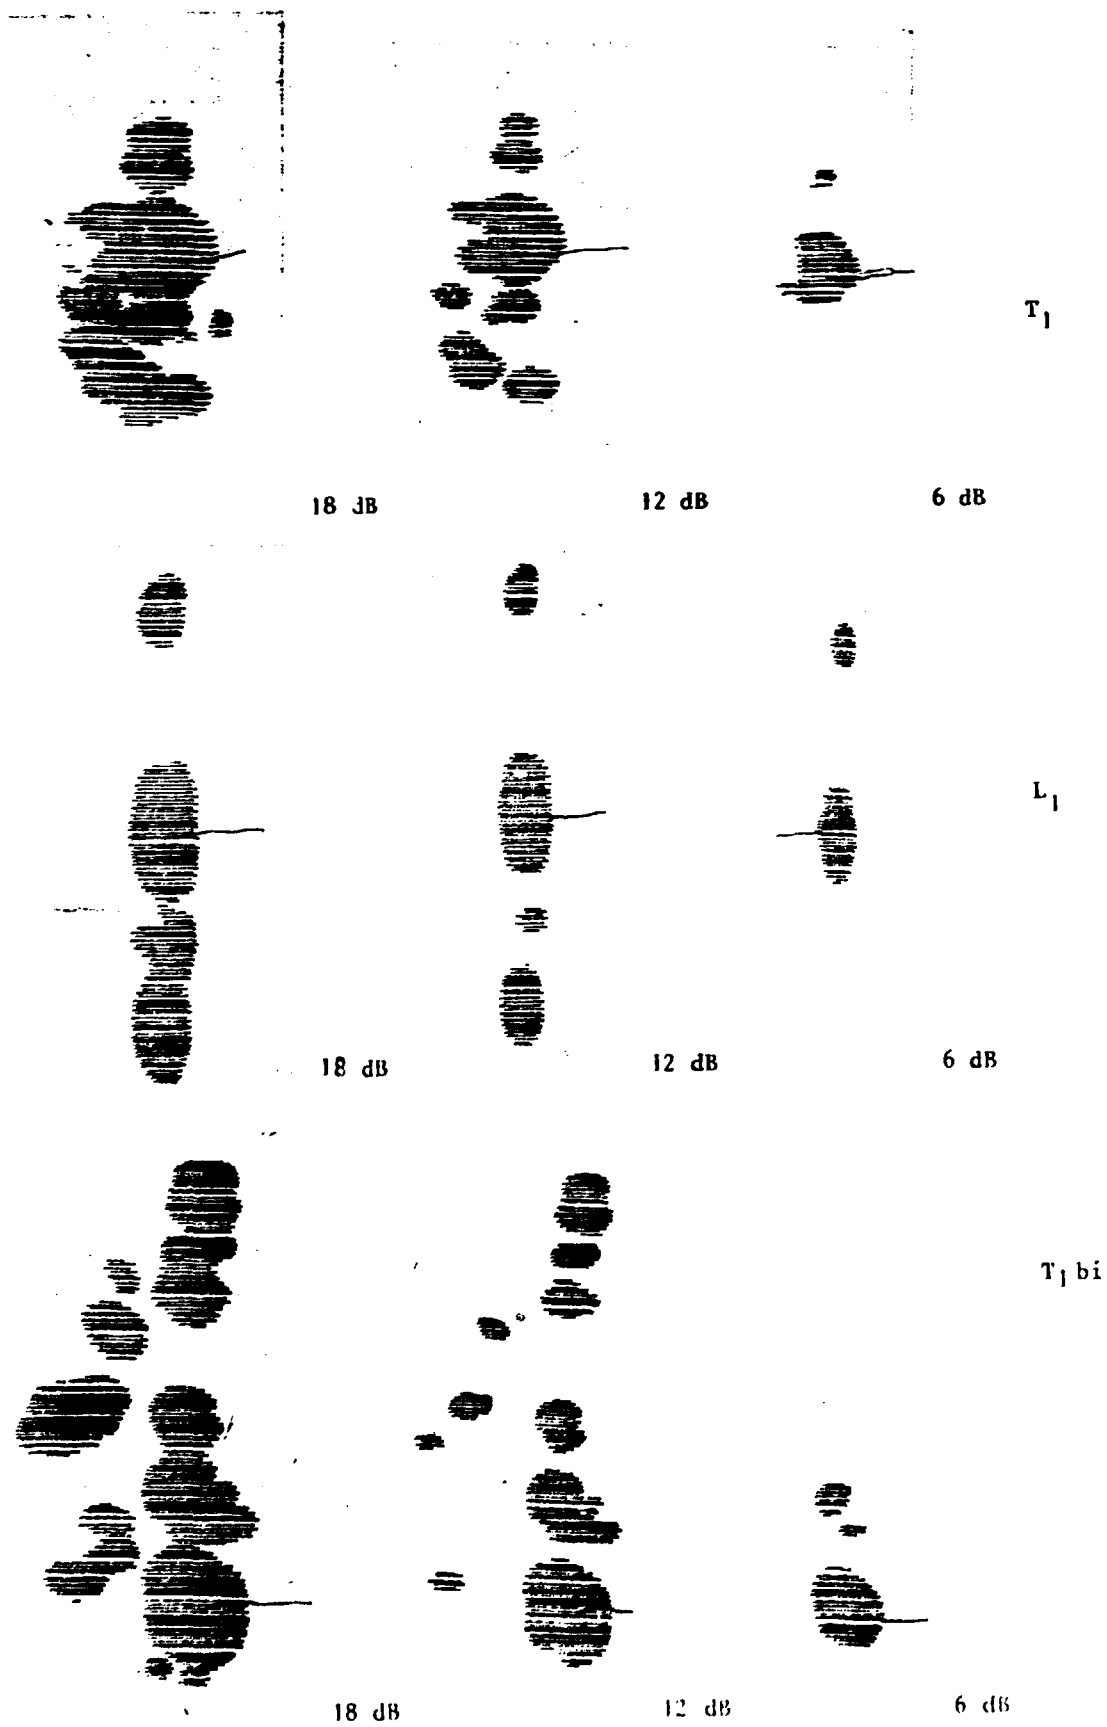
Test specimen 3/5 - Typical C-Scans after 107500 cycles just before rupture.
